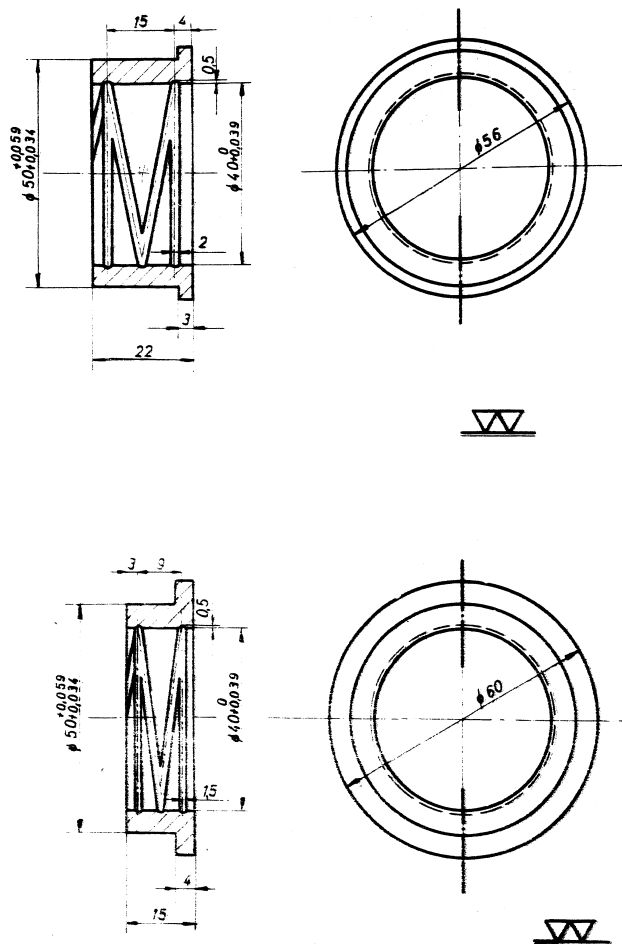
BRONZE BEARINGS — SPRING DEVICE
